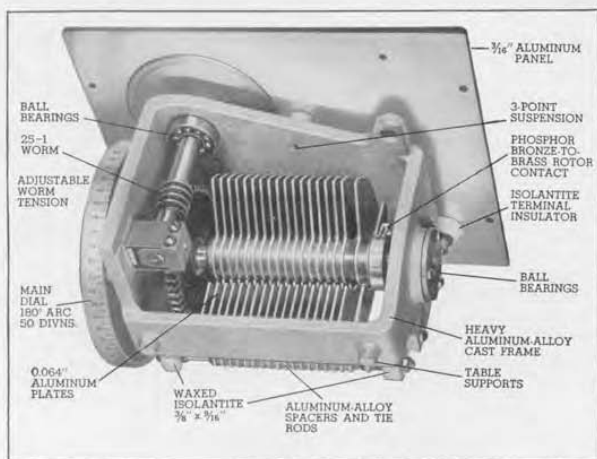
View of TYPE 722-H Precision Condenser with cabinet removed showing constructional details
